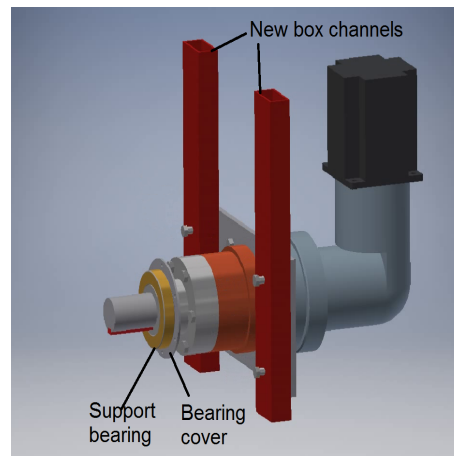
Assembly 1 – Bolted assembly of gearbox, clutch system and new mounting plate on the new box channels
